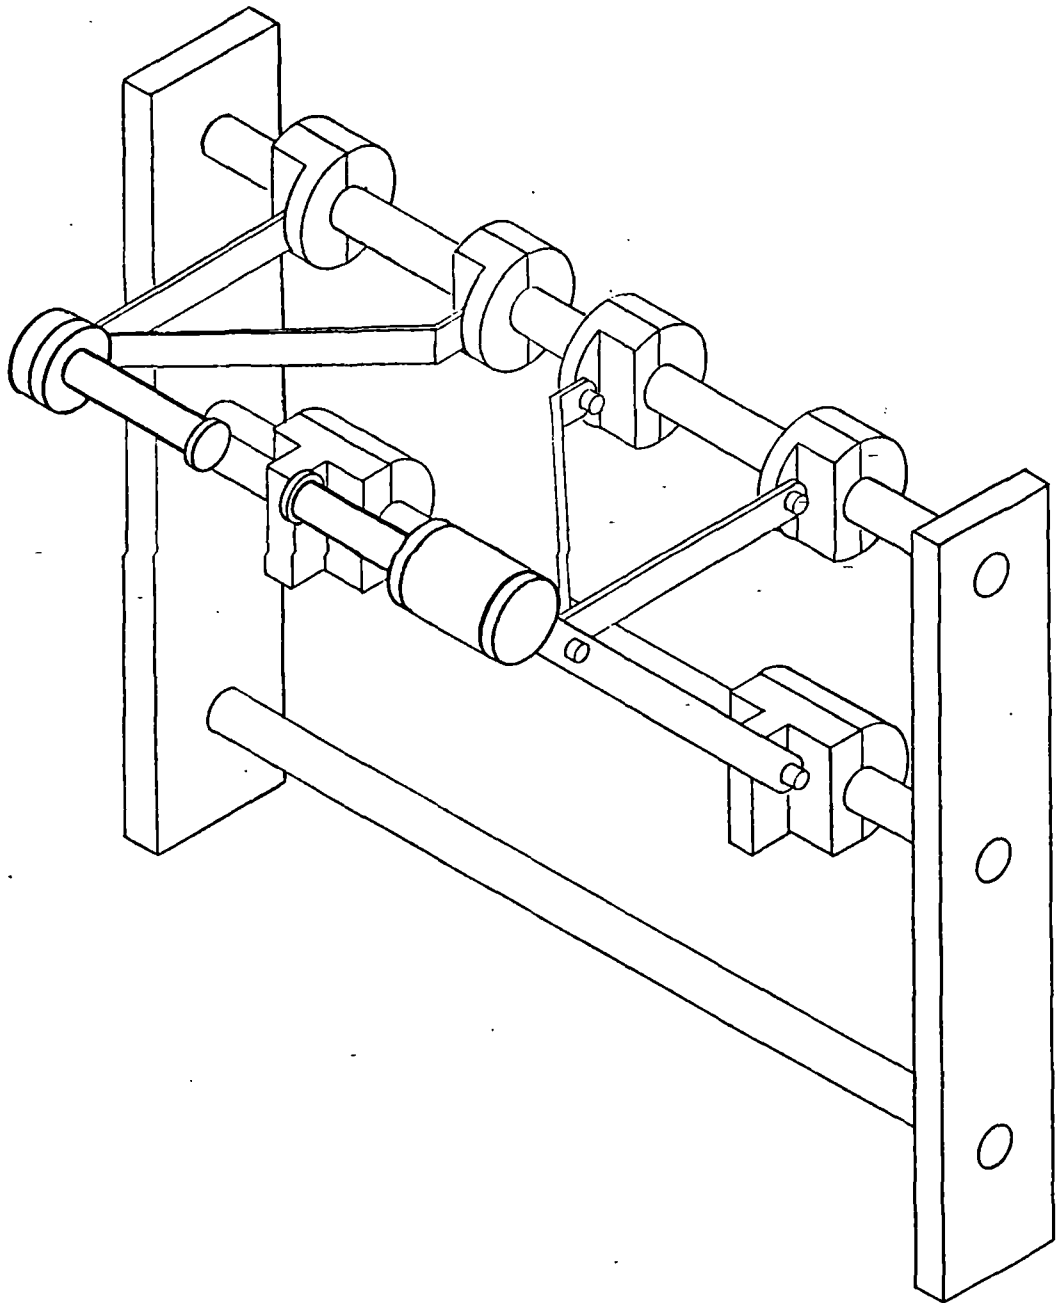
Mounting frame used to support the chin-up hand grips with an existing wall bar system. The right hand grip includes the instrumented hand transducer.
